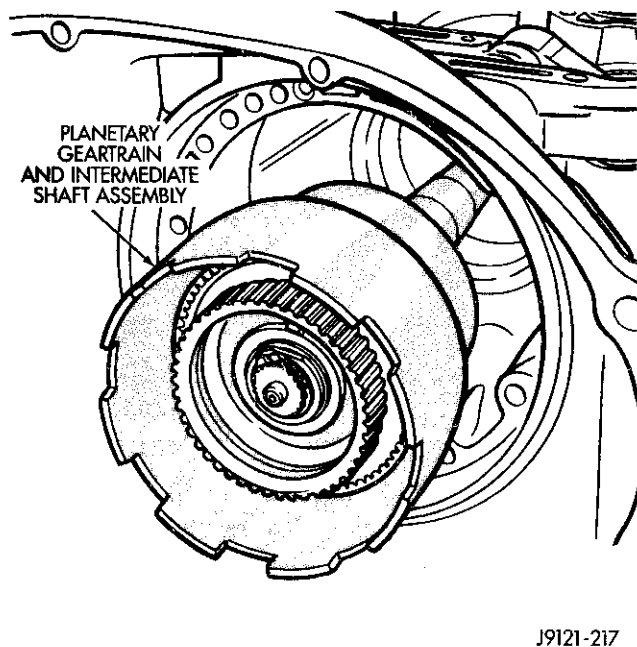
Removing Planetary Geartrain And Intermediate Shaft Assembly
